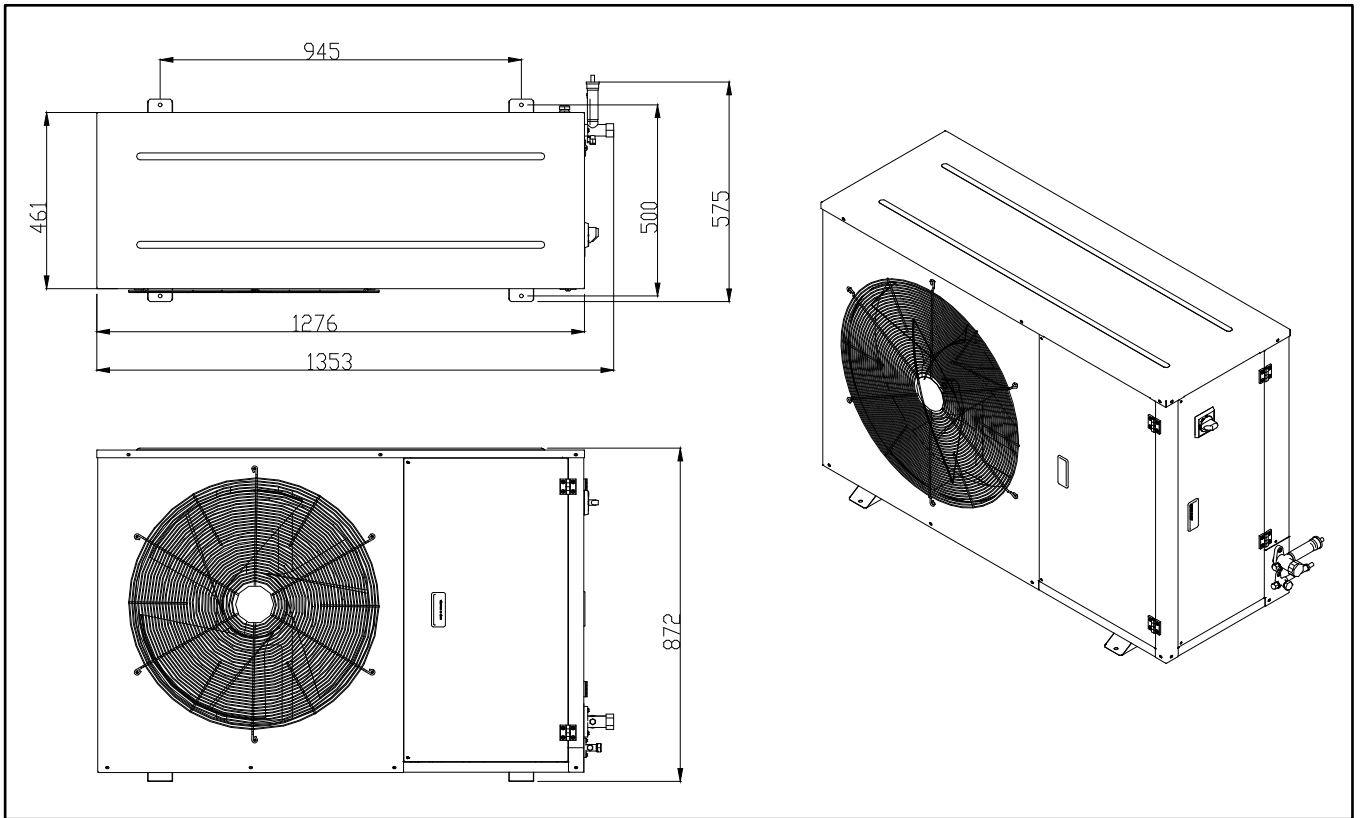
Outline Dimension JEHS-0800-B4-M-3
